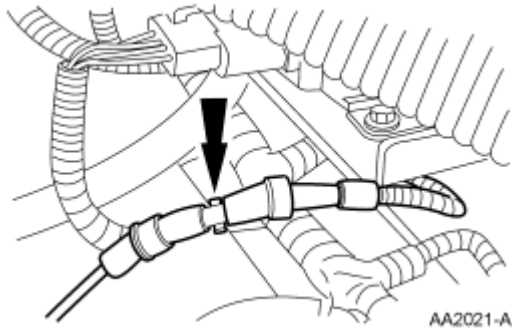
Locating Vacuum Hose & Vacuum Reservoir
